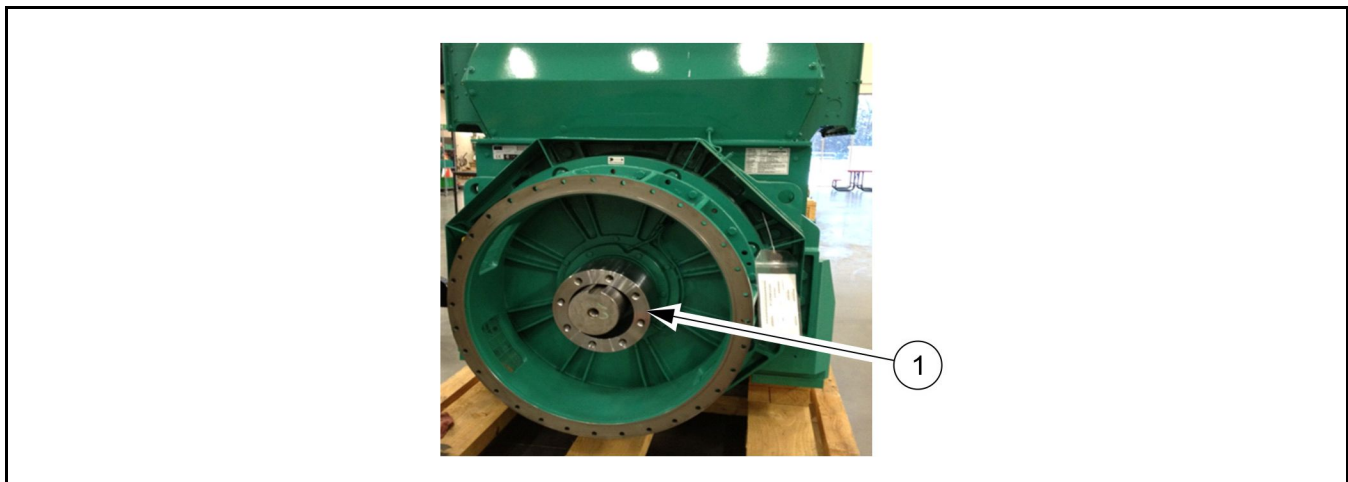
LUBRICATE INNER DIAMETER OF THE HUB OUTER RING
